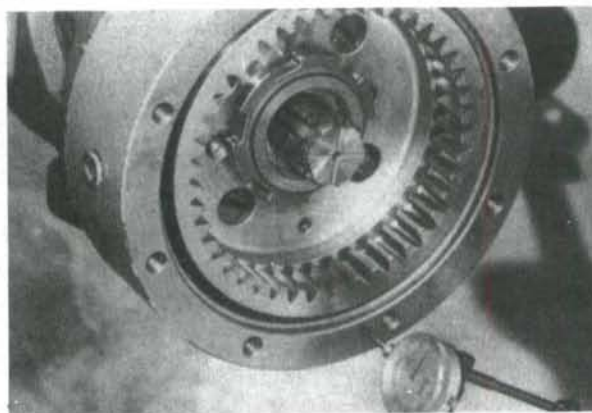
To set stub axle bearing preload, mount a dial indicator so probe contacts face of wheel hub. Measure end play and refer to text.
